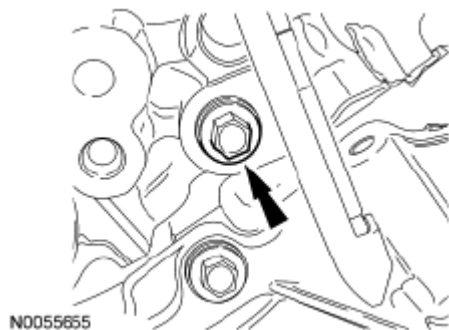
Locating Primary Timing Chain Guide Lower Bolt - RH
